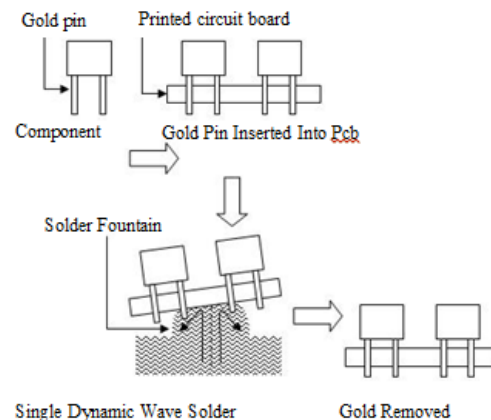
Single dynamic wave soldering process for PTH component pre-tinning and soldering
